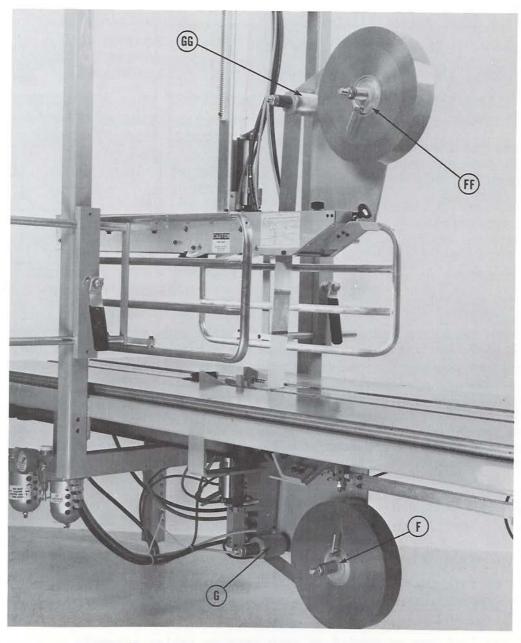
TAPE ROLL LOADING - LEFT FRONT VIEW
